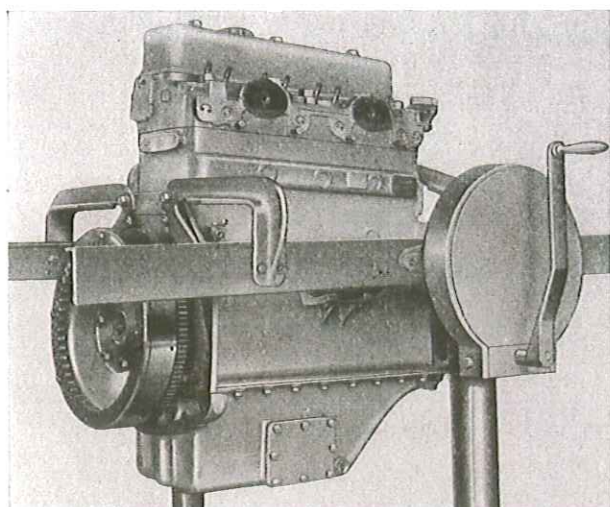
Right-side view of engine on rotary stand ARR 2216 (Note the rear brackets position).
